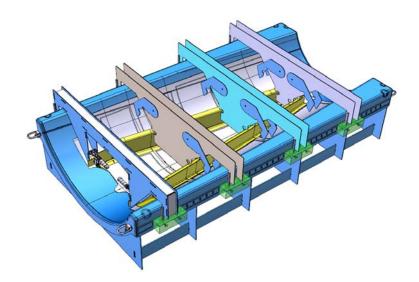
Tooling for secondary bonding of the spars to the airbrake skin (Source DLR FA Braunschweig)
